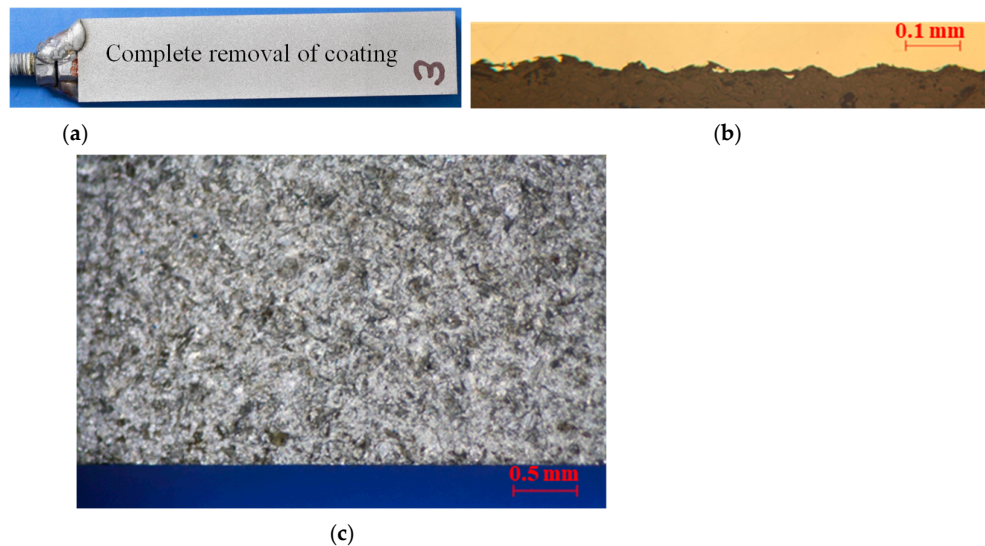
Removal of coating from sample 3 with productive conditions: (a) top view, (b) side view, and (c) macro-image of the surface without coating residues.
